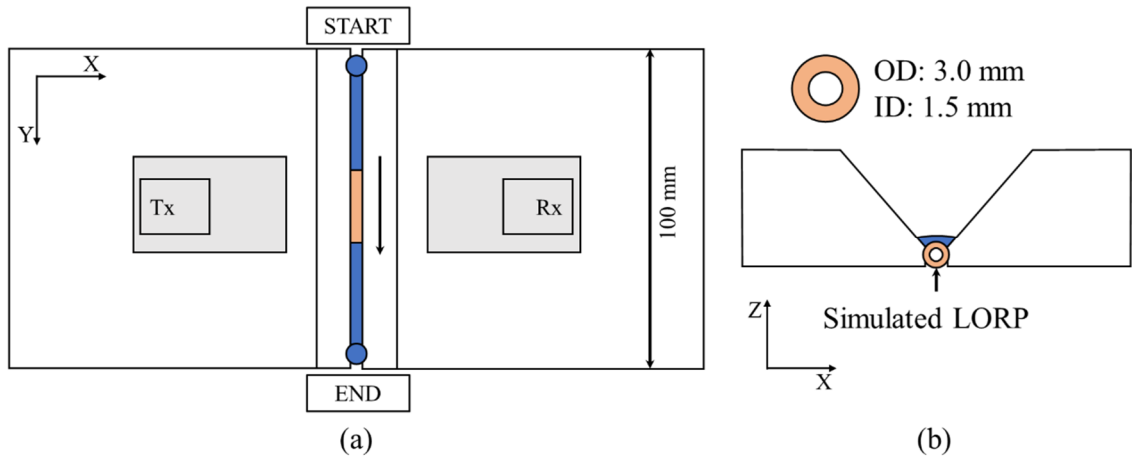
Schematic view of experiment 3 showing position of weld in relation to probes in both a (a) plan and (b) section view. [144]
